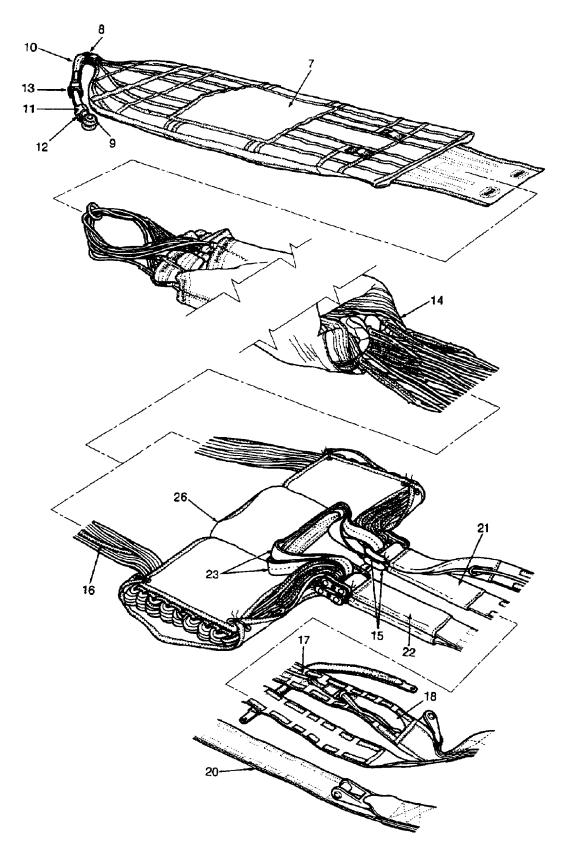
A/P28S-32(V) 1 to 6 Parachute Assembly (Sheet 3 of 6)
